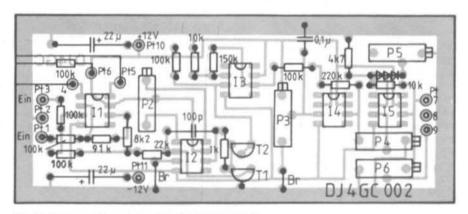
Component layout plan of the PCB DJ 4 GC 002
